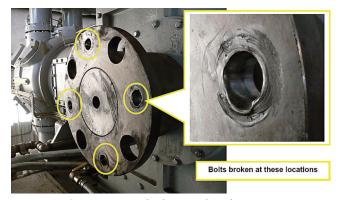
Case 3 Disc Pack Flange Bolt Hole Damage.
